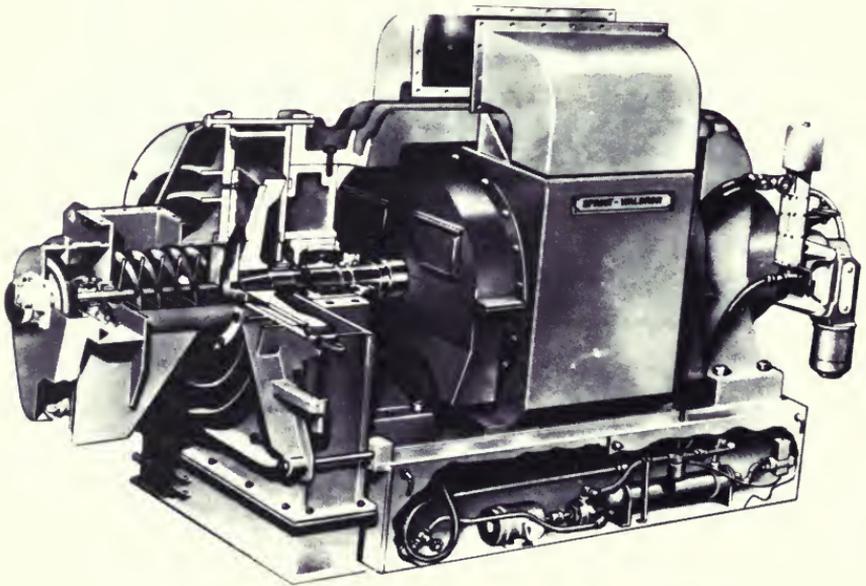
Coaxial feeder. Stock inlet is at top left; steam outlet is at bottom center; stock exits at right to refiner. (Drawing courtesy of Sprout Waldron.)
